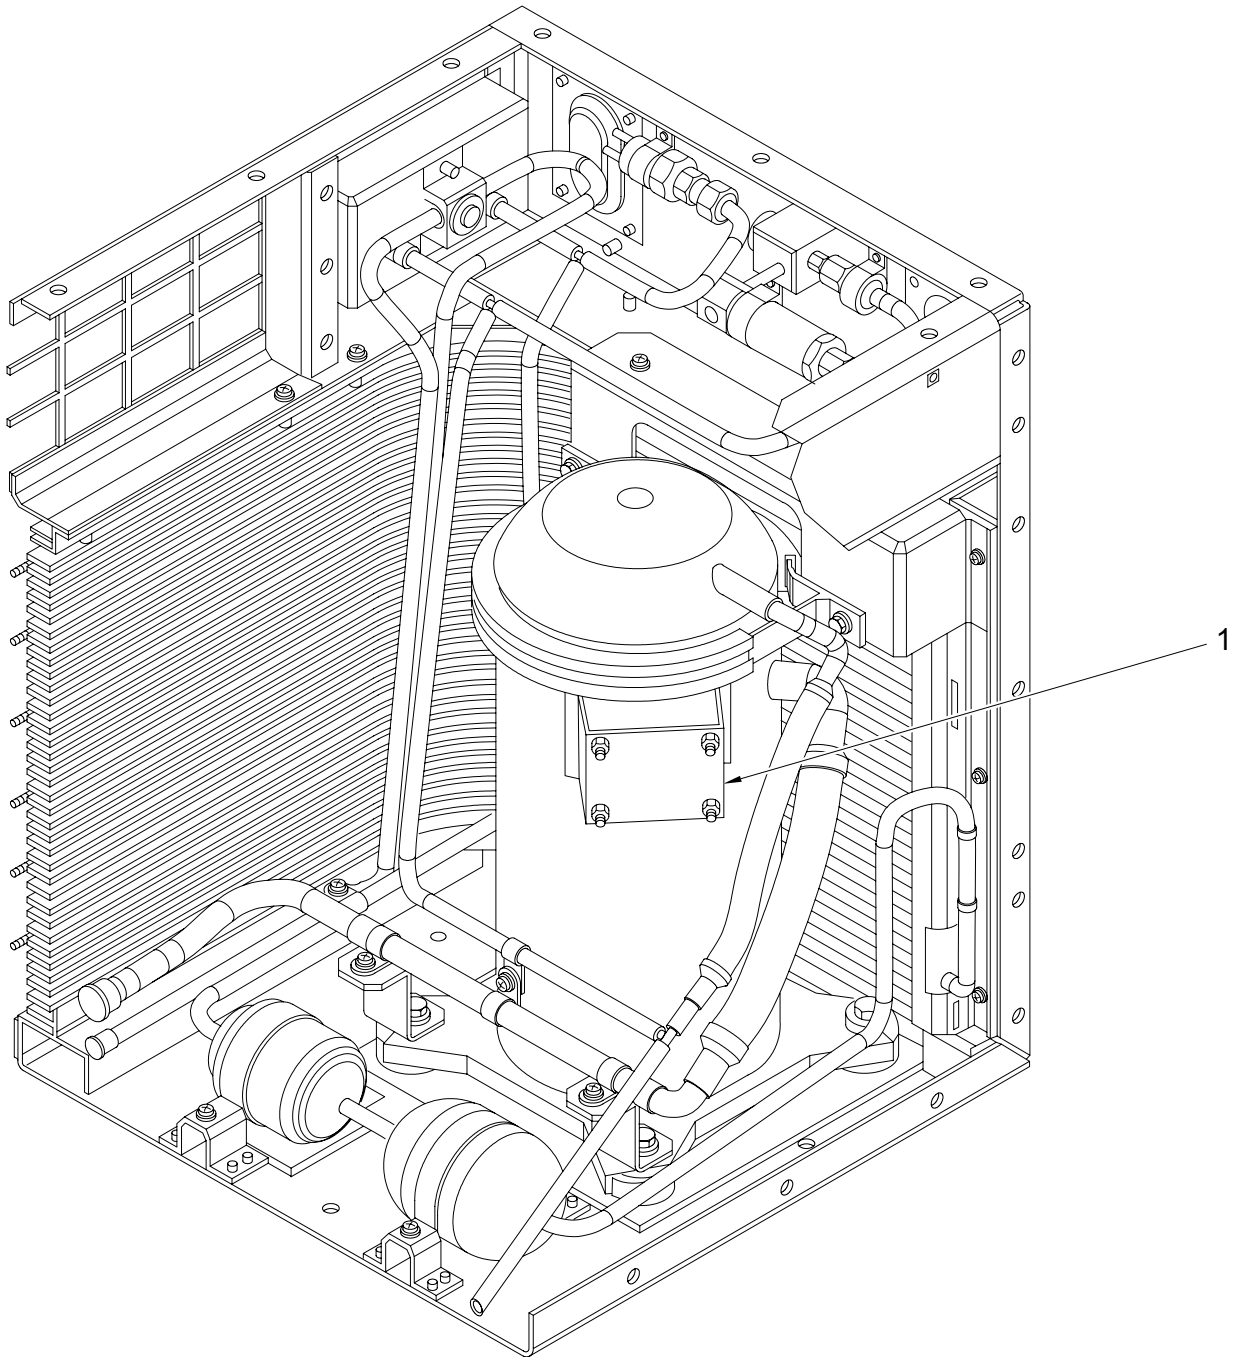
COMPRESSOR ASSEMBLY - INSTALLED.
